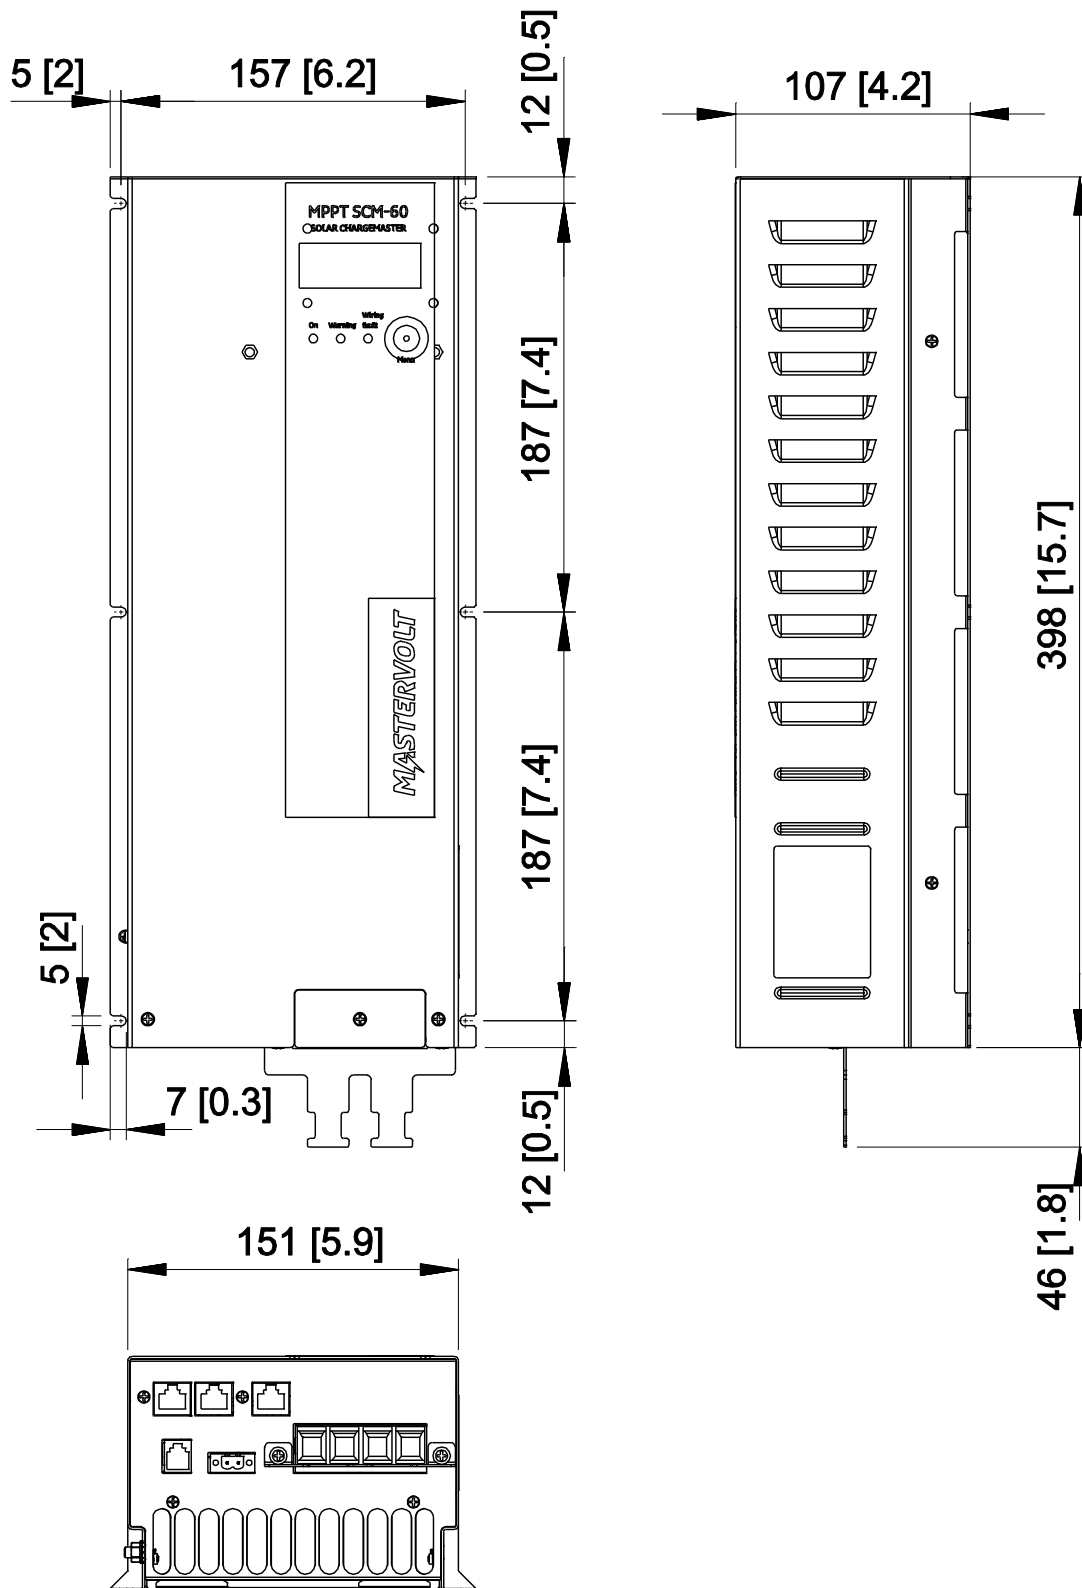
Dimensions of the Solar ChargeMaster in mm [inches]
